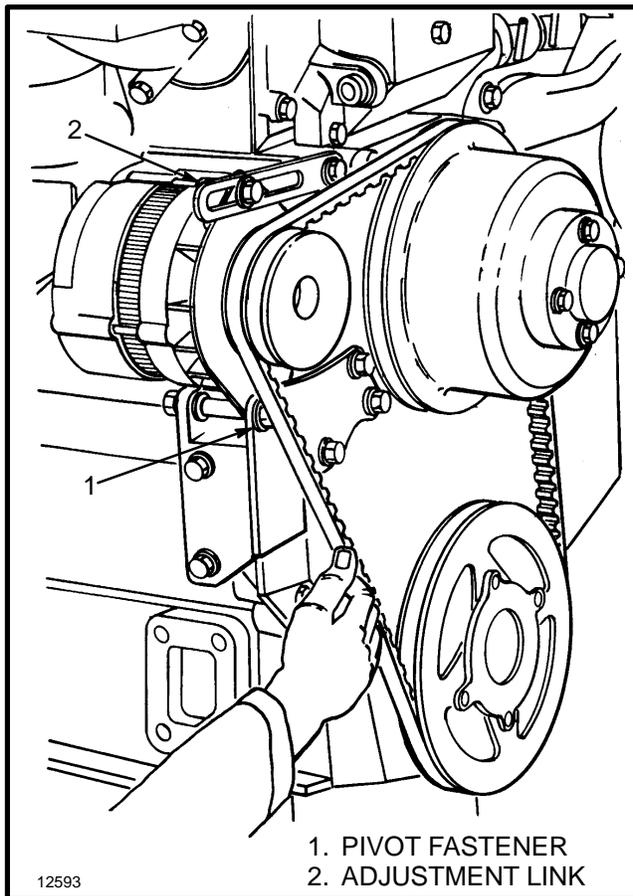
CHECK AND ADJUST DRIVE BELT TENSION (PERKINS DIESEL)
